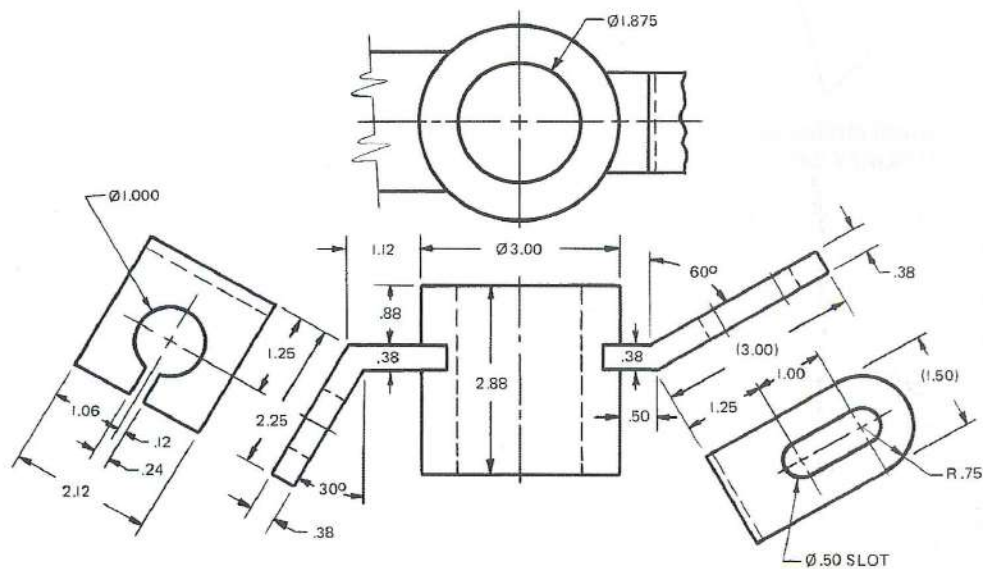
Dimensioning a multi-auxiliary-view drawing.
